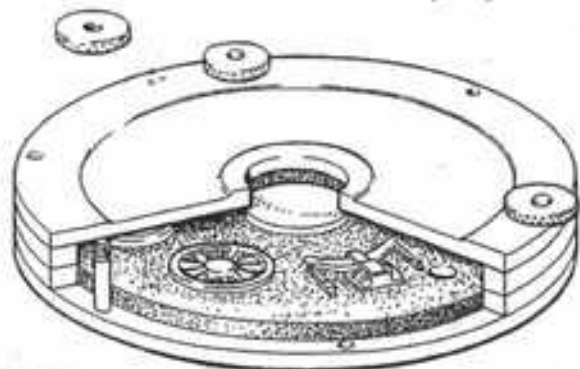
Cut out view showing the assembled system ready to spin in rubber
